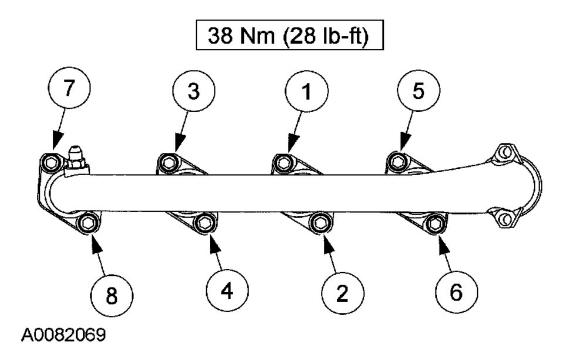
Identifying LH Exhaust Manifold Bolt Tightening Sequence With Torque Specification Courtesy of FORD MOTOR CO.
